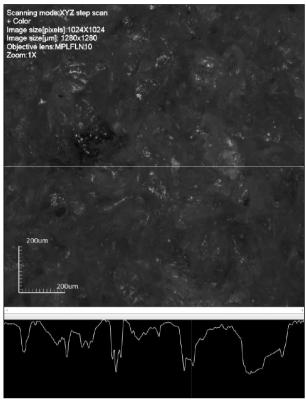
Surface Topography of a Laser Dressed Wheel Surface
